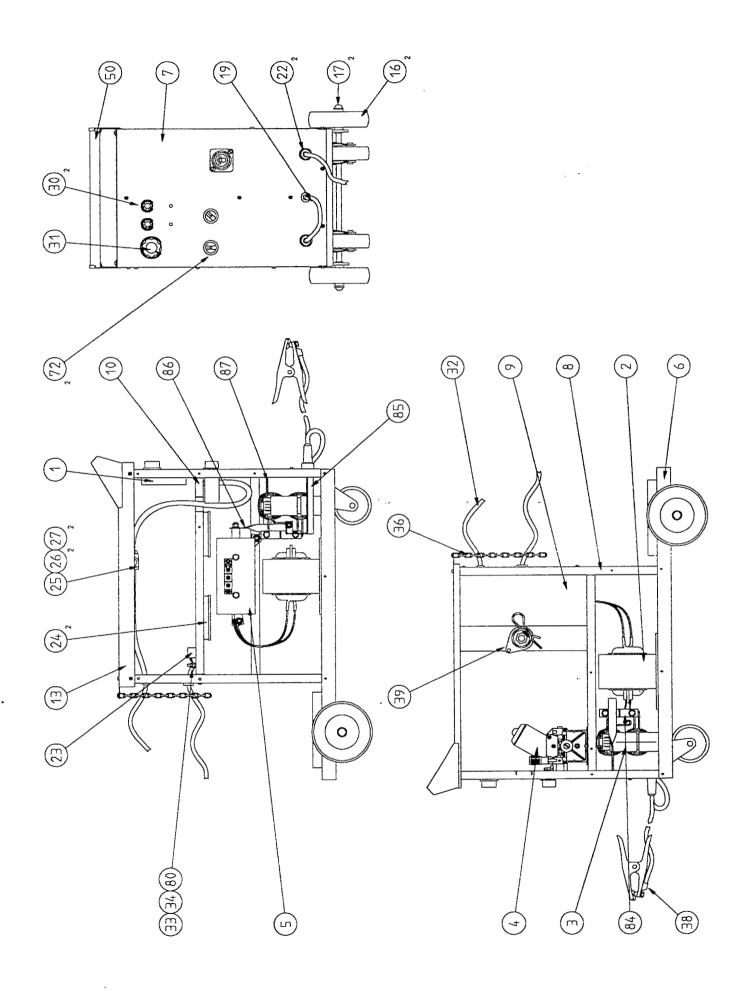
WELDMATIC 215S POWER SOURCE ASSEMBLY
